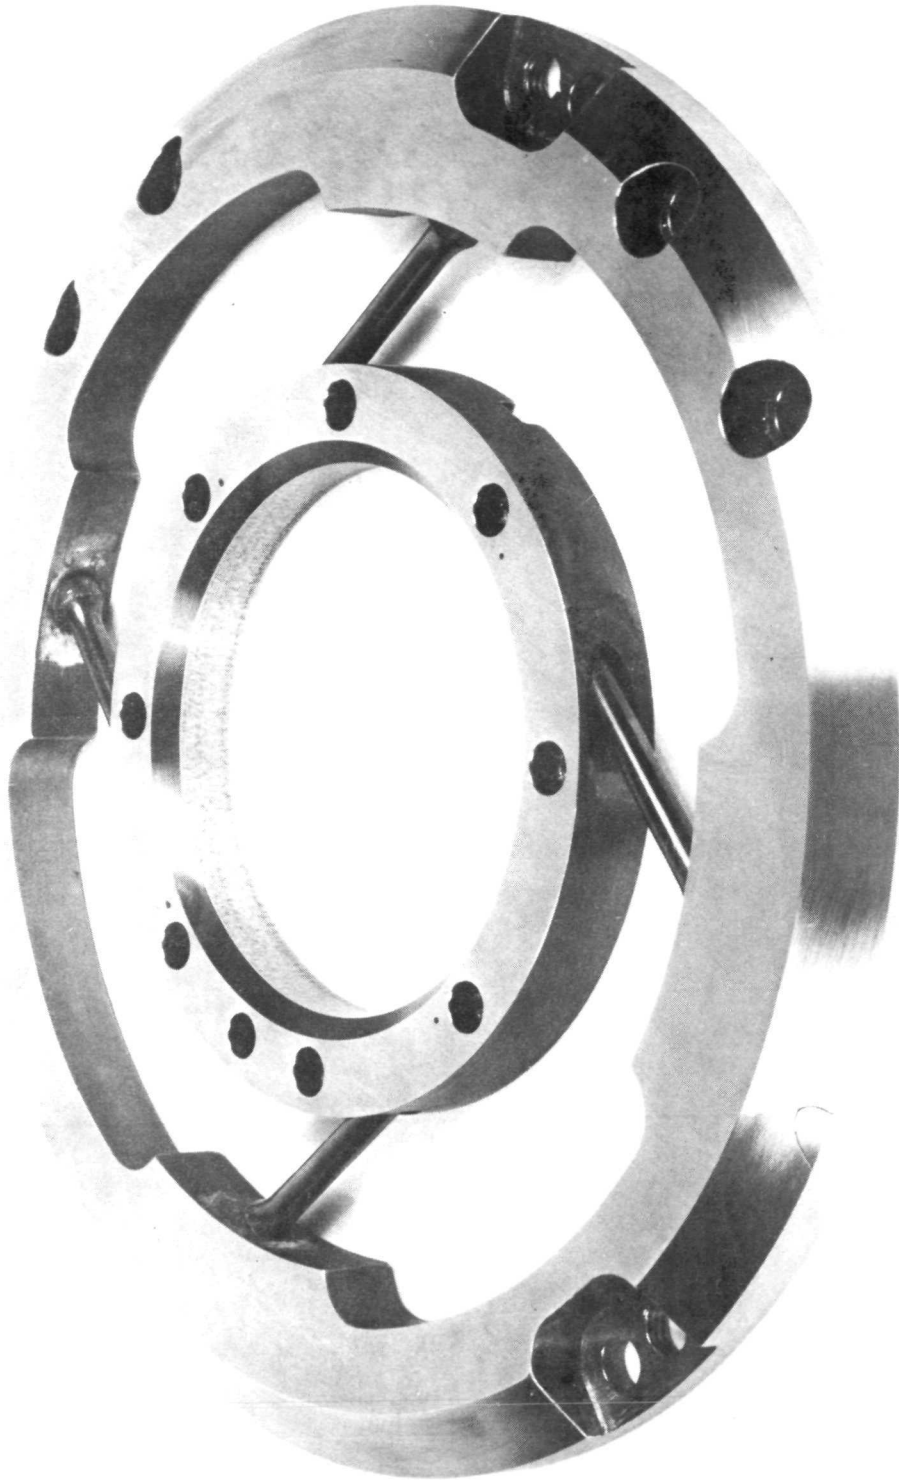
Spiral-Groove Thrust Bearing Flexure Mount Showing Tangential Spokes
